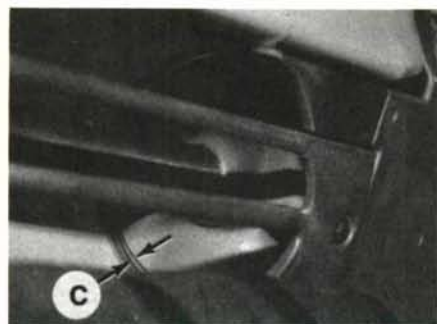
Clearance (C) between impeller and impeller housing should be at least 0.1 mm (0.004 in.) and should not exceed 0.87 mm (0.034 in.) measured throughout entire impeller circumference.
